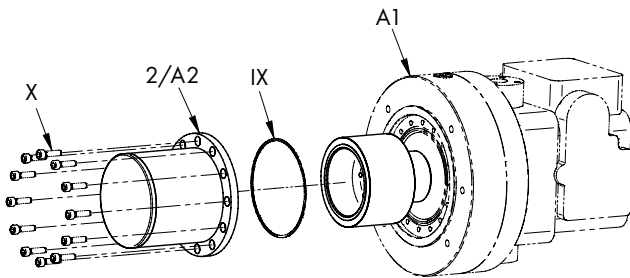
Basic canister assembly/sealing on a flange for technically tight systems (A4)
